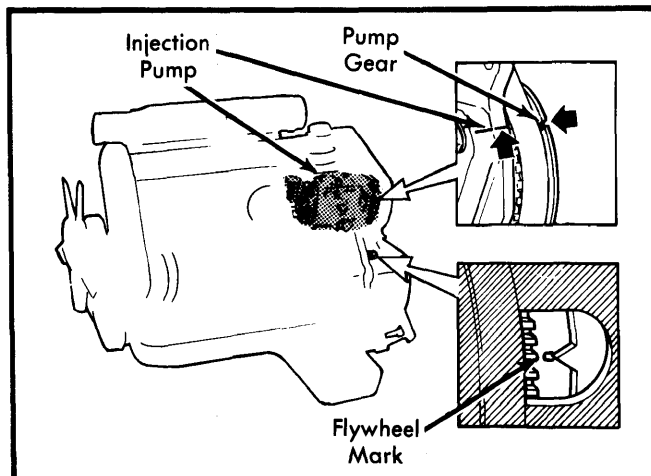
Aligning Timing Marks Prior to Fuel Injection Pump Removal
